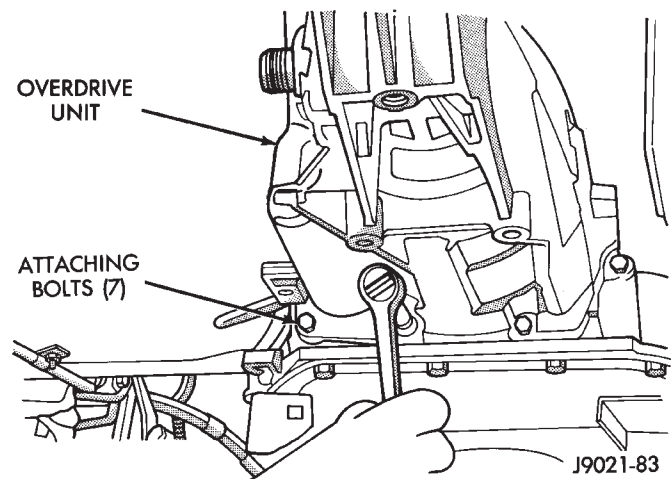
Removing/Installing Overdrive Unit Attaching Bolts
